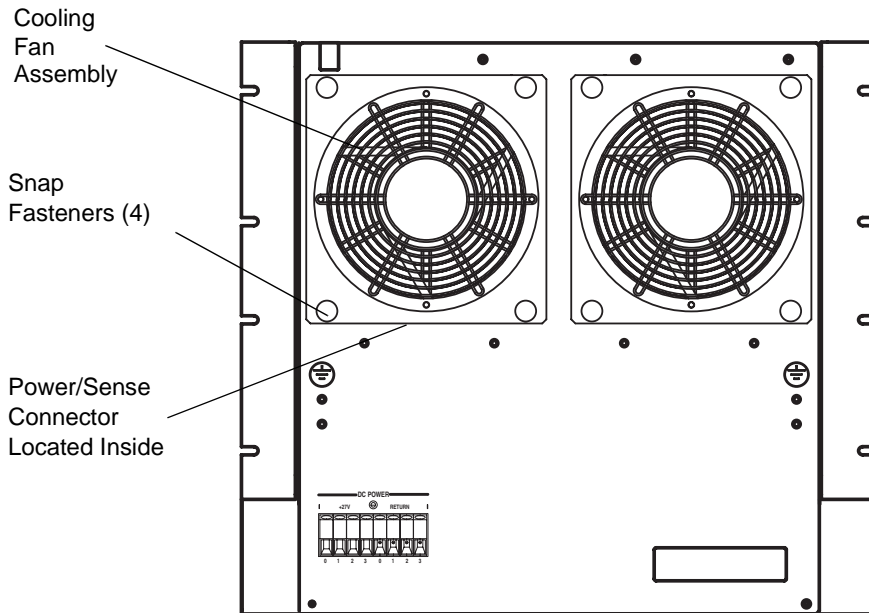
Rear Mount Cooling Fan Removal and Replacement
